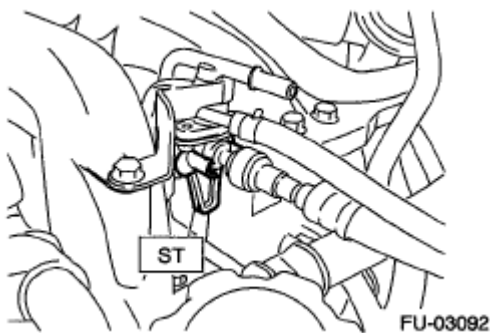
Attaching Connector Remover 18371Aa000 To Fuel Return Pipe
